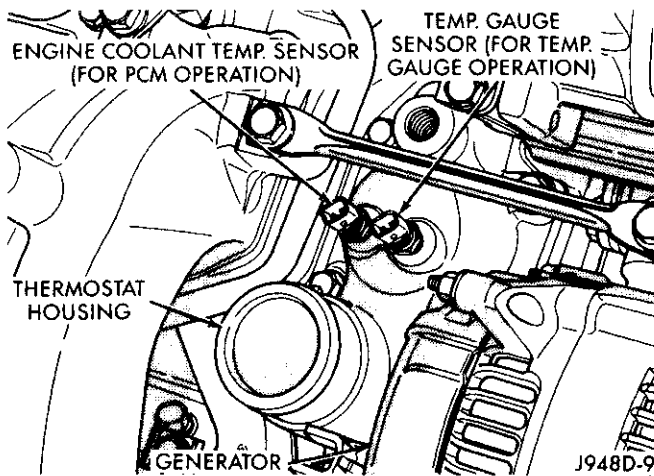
Engine Coolant Temperature Sensor—8.0L Engine
